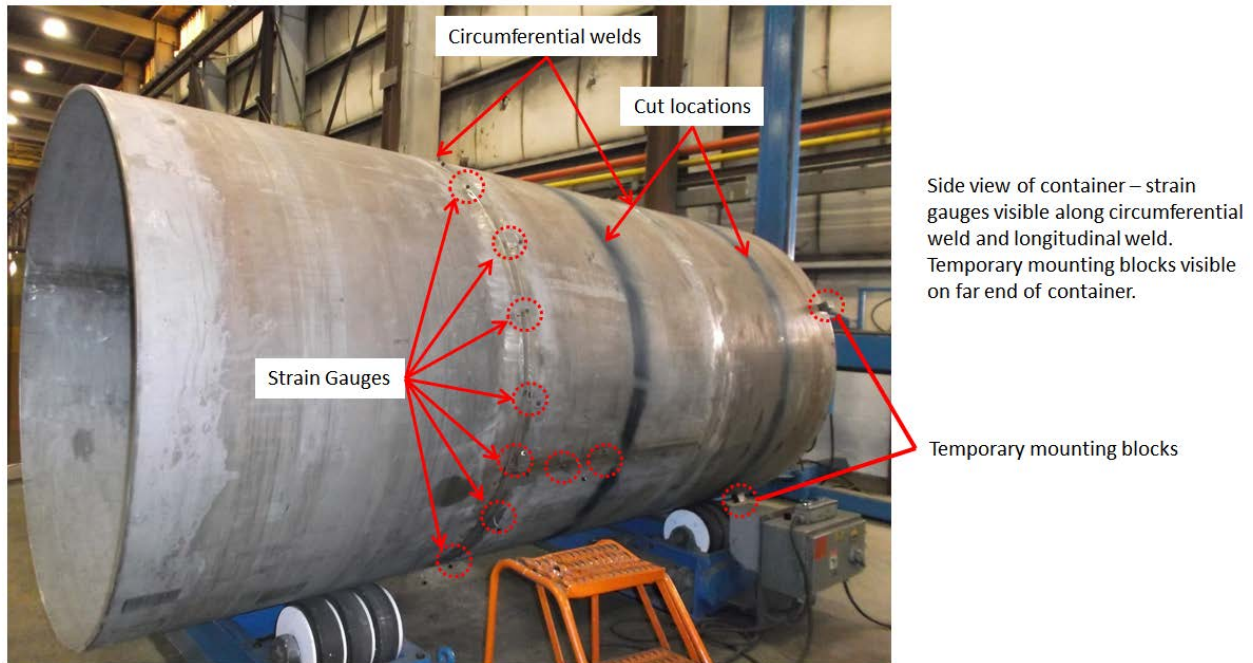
Location of surface strain gauges positioned along the longitudinal and circumferential welds. Also shown is the position of the temporary mounting blocks welded to the base of the container to facilitate positioning while the cuts were being made.
